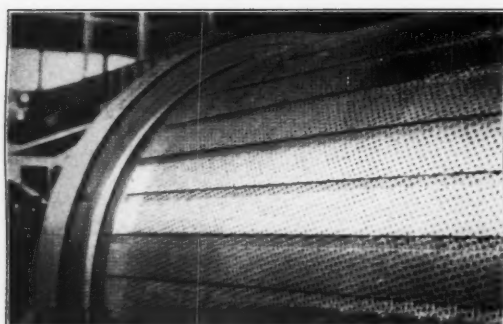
Dovetail Grooving and Threading of Bronze Shell and Steel End Rings
